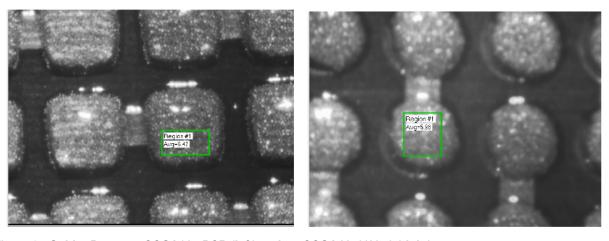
Solder Paste on CCGA624 PCB (left) and on CCGA1152/1272 (right)
